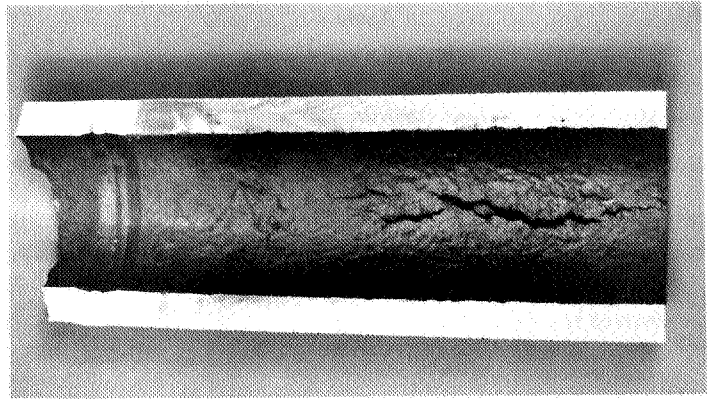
Longitudinal Rupture in Parent Metal Adjacent to Circumferential Weld Crack
